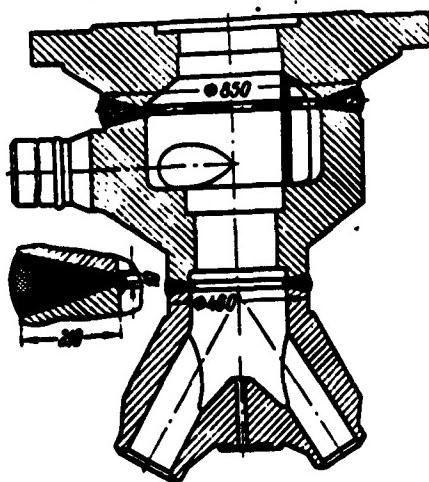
Automatic shutoff-valve chest of the SVK-150 turbine in the welded version consisting of forged parts.
